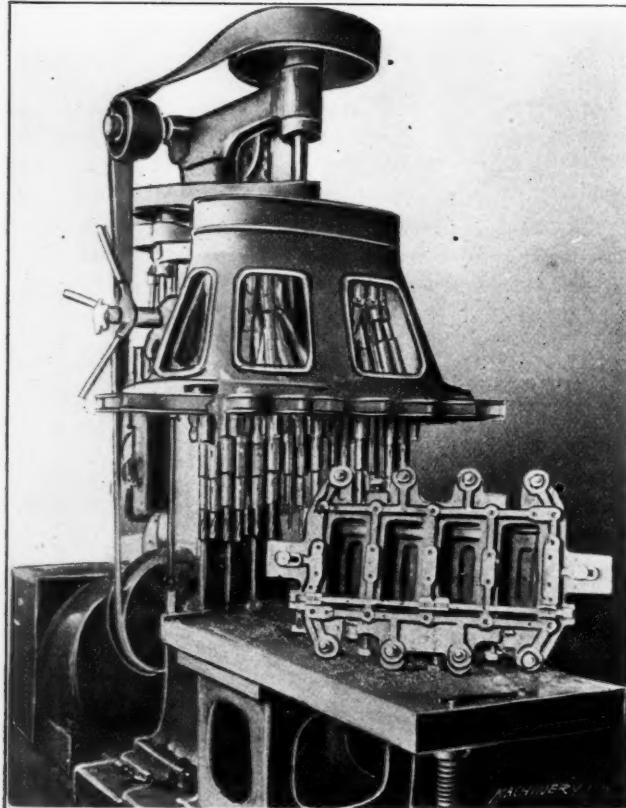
Twenty-four-spindle Machine for Drilling the Frames
